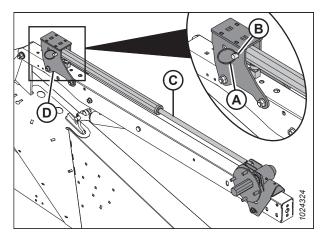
Left Reel Arm Cylinder in Forward Position
